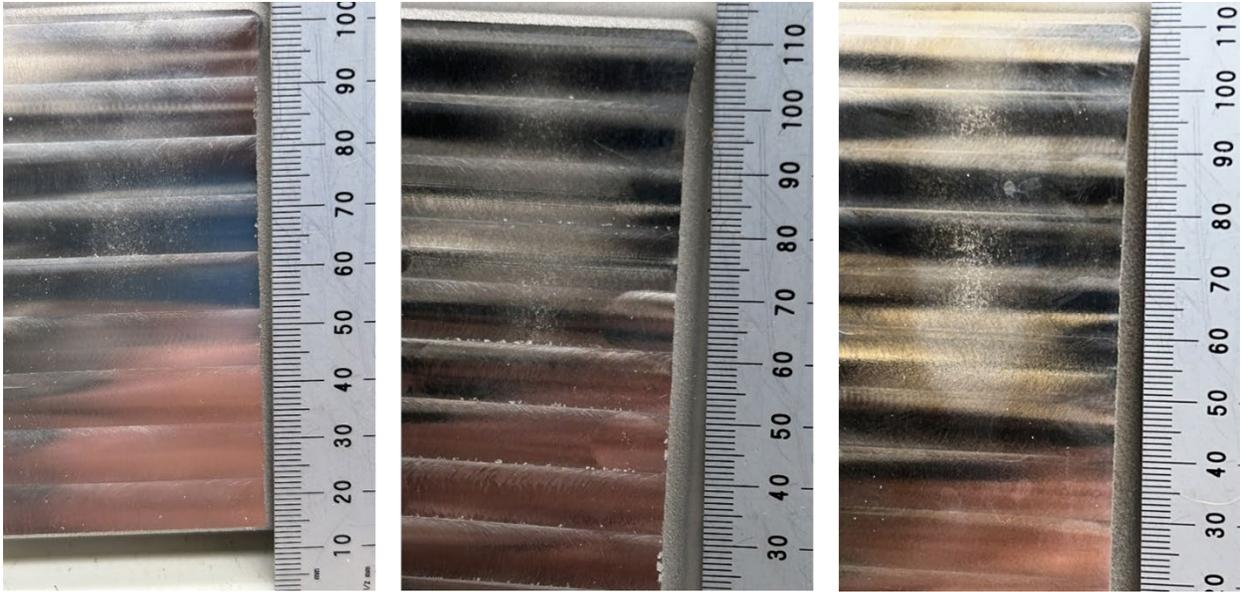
Inconel 625/CRC-410-1 chromium carbide blend shown after 250 hours cavitation testing. Left: Cold Spray 2.1. Middle: Cold Spray 2.2. Right: Cold Spray 2.3. Ruler tick marks are in millimeters.
